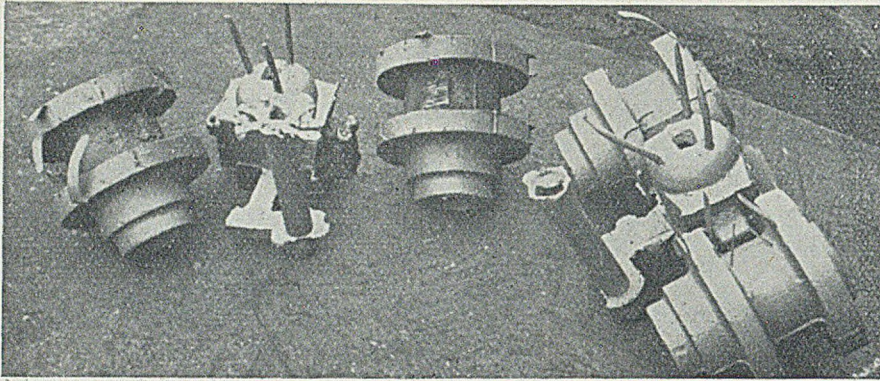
Aveling Hub Castings, separately and with Running and Feeding Systems attached. In this case the Head itself provides Remote Heat.
